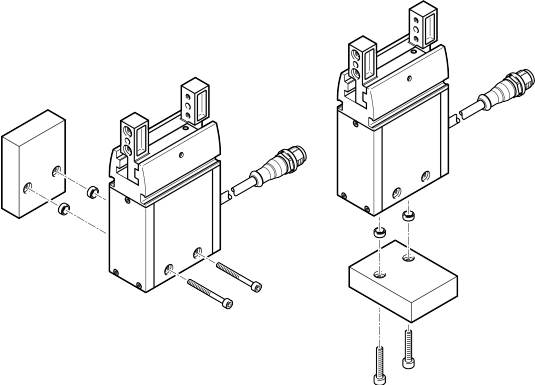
Through-hole mounting on the side, direct fastening underneath
